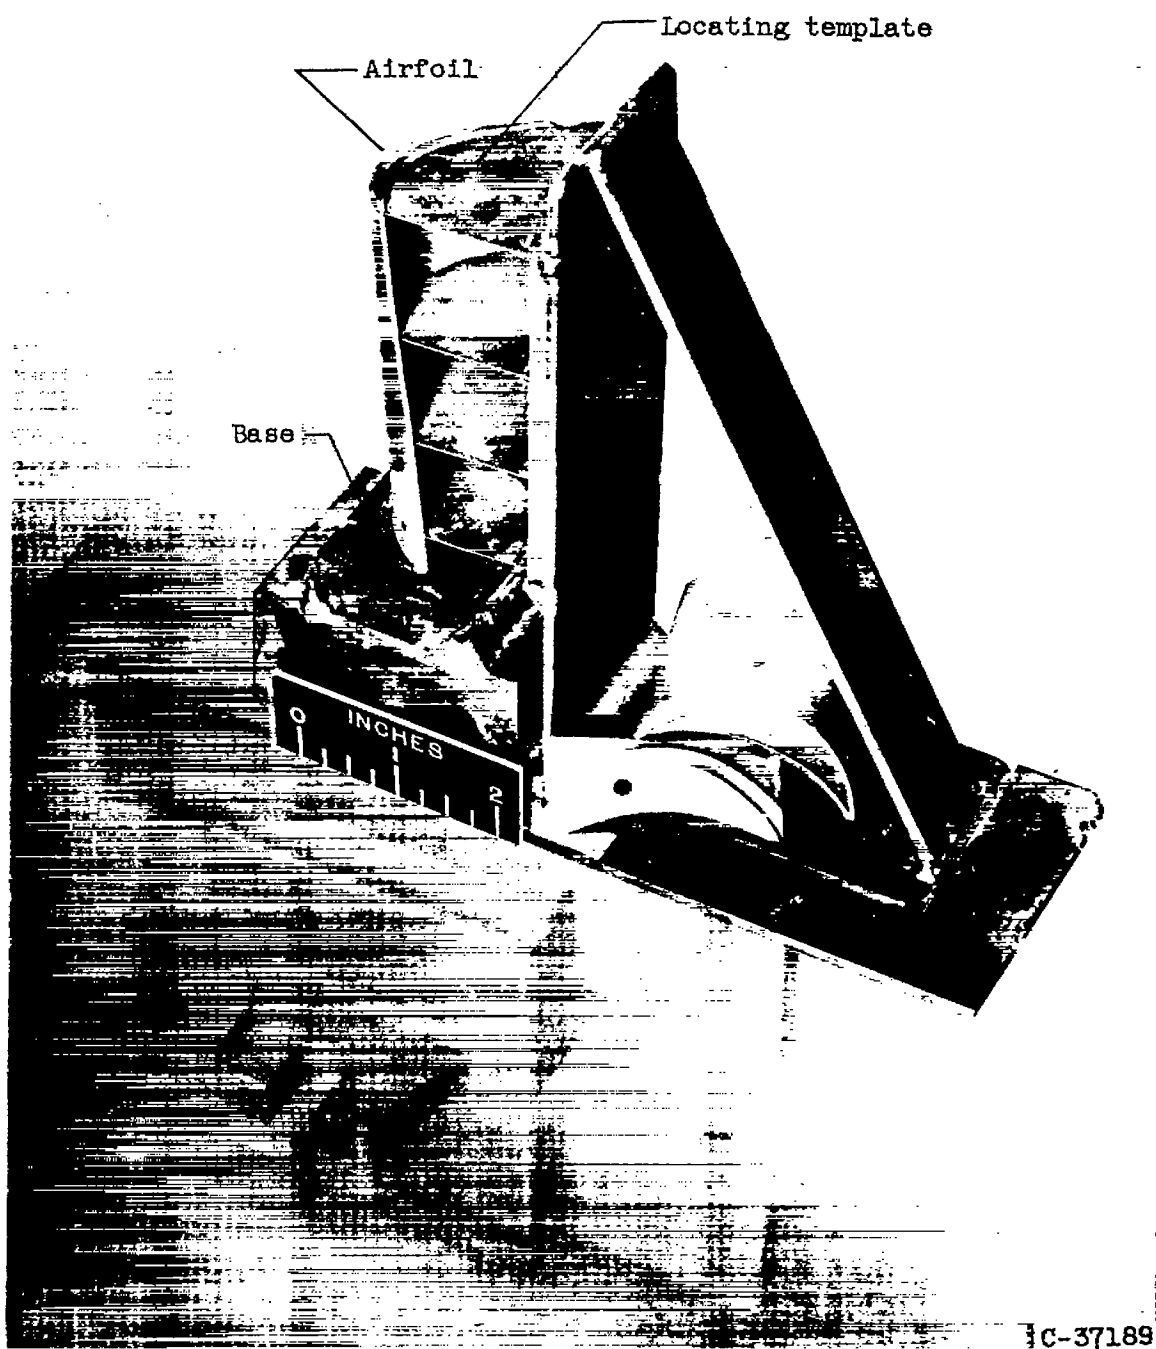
Fixture used in maintaining the correct relationship between sheet-metal airfoil and base platform during tack-welding prior to welding or brazing.
